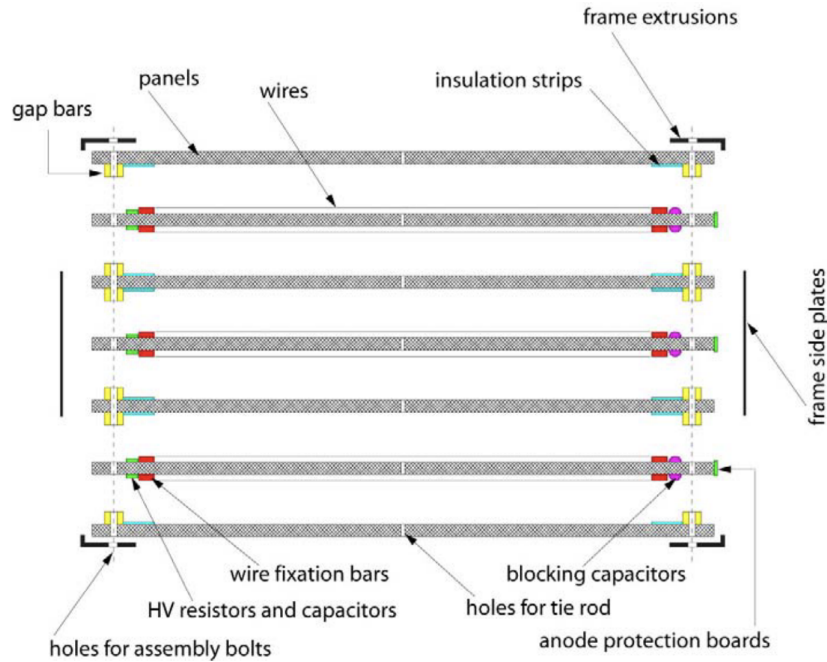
An exploded view of the inside of a CSC chamber with its seven layers of panels[19].
